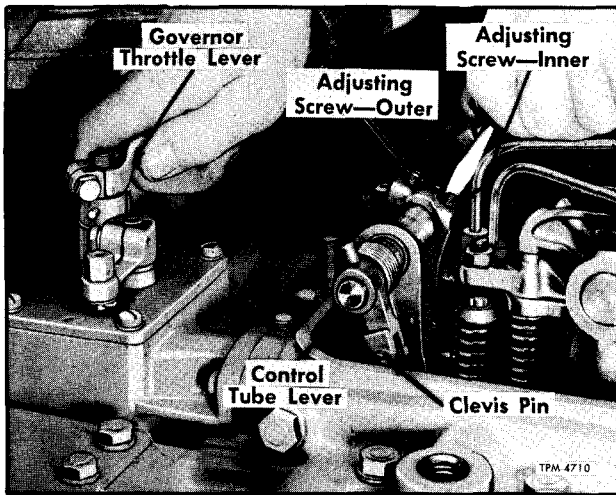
Injector Control Rack Adjustment (In-Line Engine)
